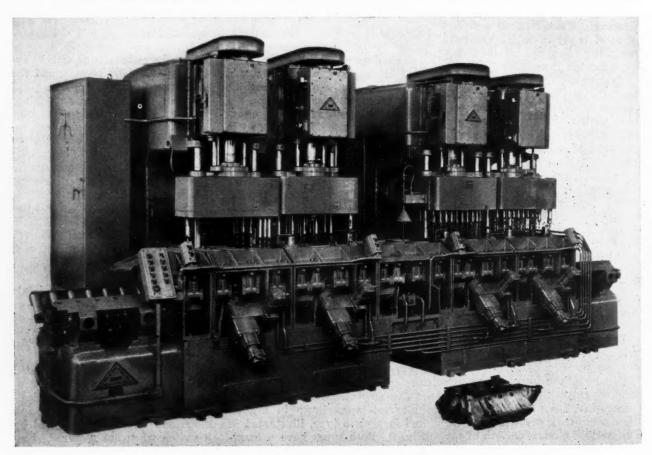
LeMaire Seven-station Machine Designed for Drilling, Reaming, Chamfering, and Counterboring the Bottom Face of V-8 Automotive-engine Cylinder Blocks
